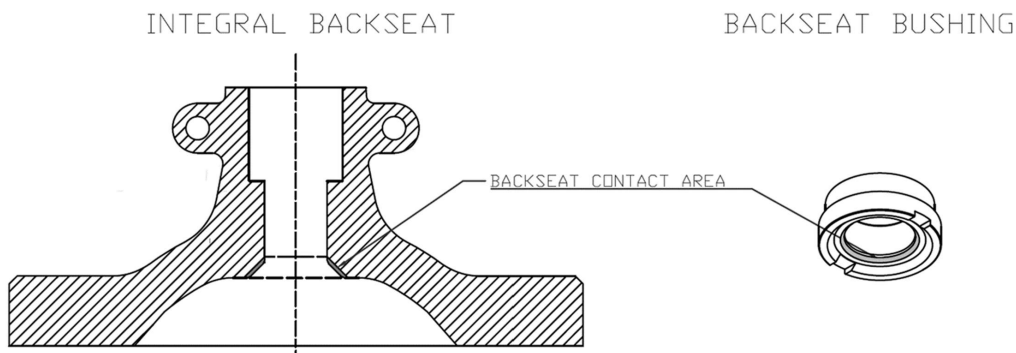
Backseat Contact Area for Integral Backseats and Backseat Bushings
